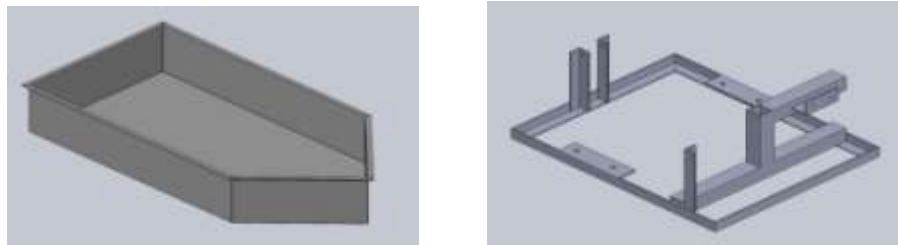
(a): Isometric View of Boat (b):Engine Mounting
